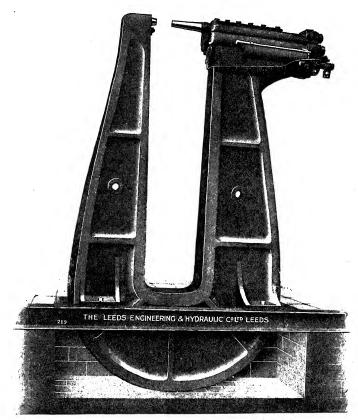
Fixed Bear-type Hydraulic Riveter
